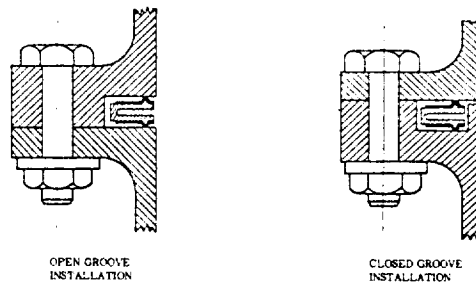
Rocketdyne Naflex pressure-actuated seal design for flange joints.
